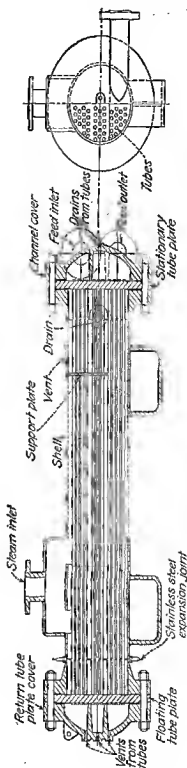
Typical section of feed-water heater. (Courtesy of Foster Wheeler Corporation.)
